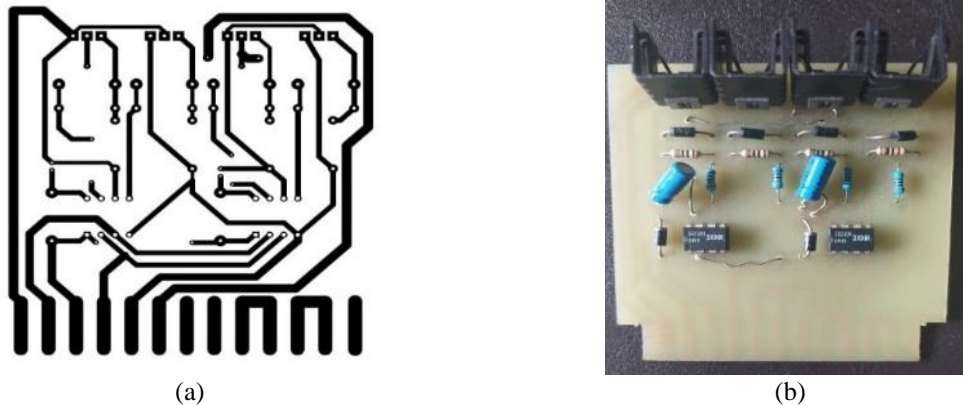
Mini-card design (a) PCB design and (b) H-bridge mini-card
